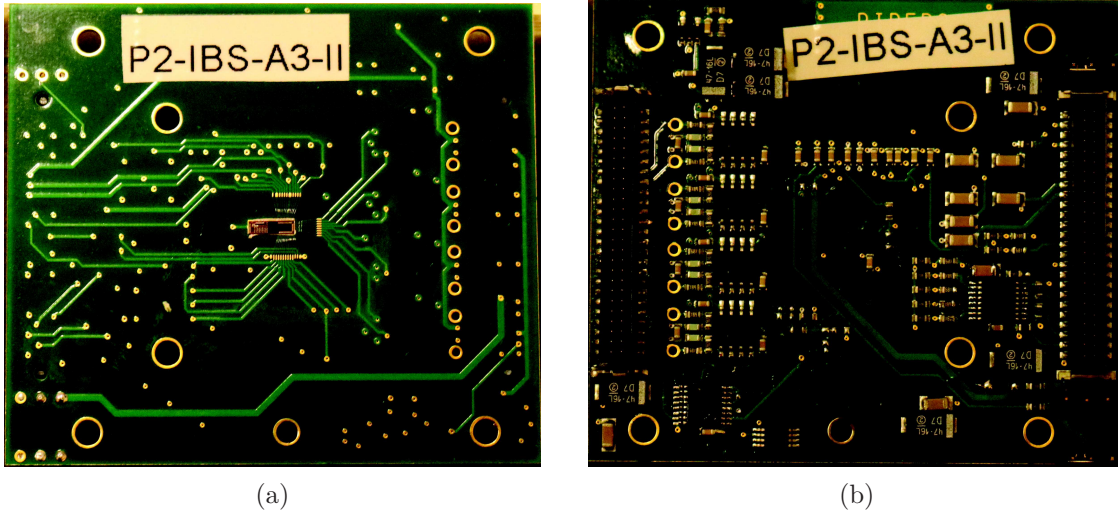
(a) A PIPPER-2 sensor wirebonded to its PCB. (b) Backside where an opening allows illumination through the PCB
